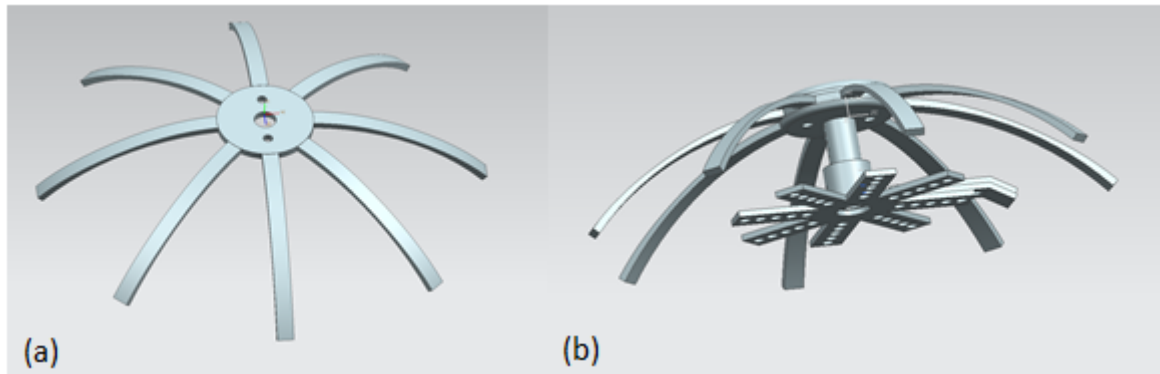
(a) CAD model of eight radially distributed spars, (b) CAD model of the assembled parts that make the jellyfish robot.
